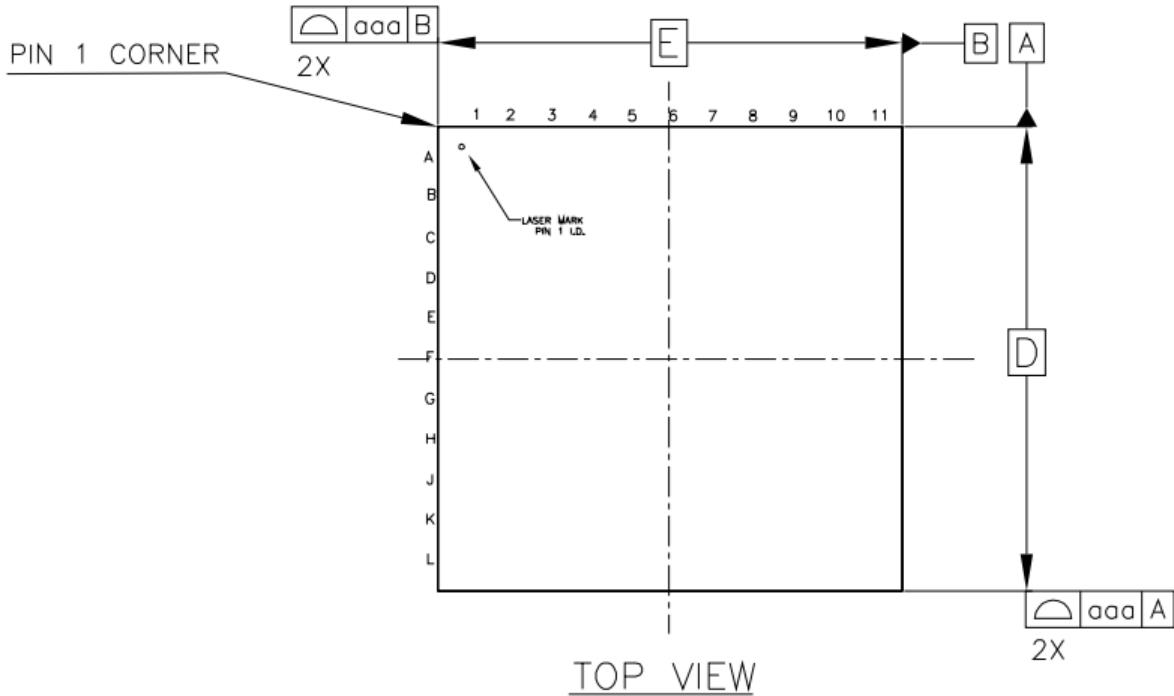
RKNanoD-G LFBGA121 Package TOP View
